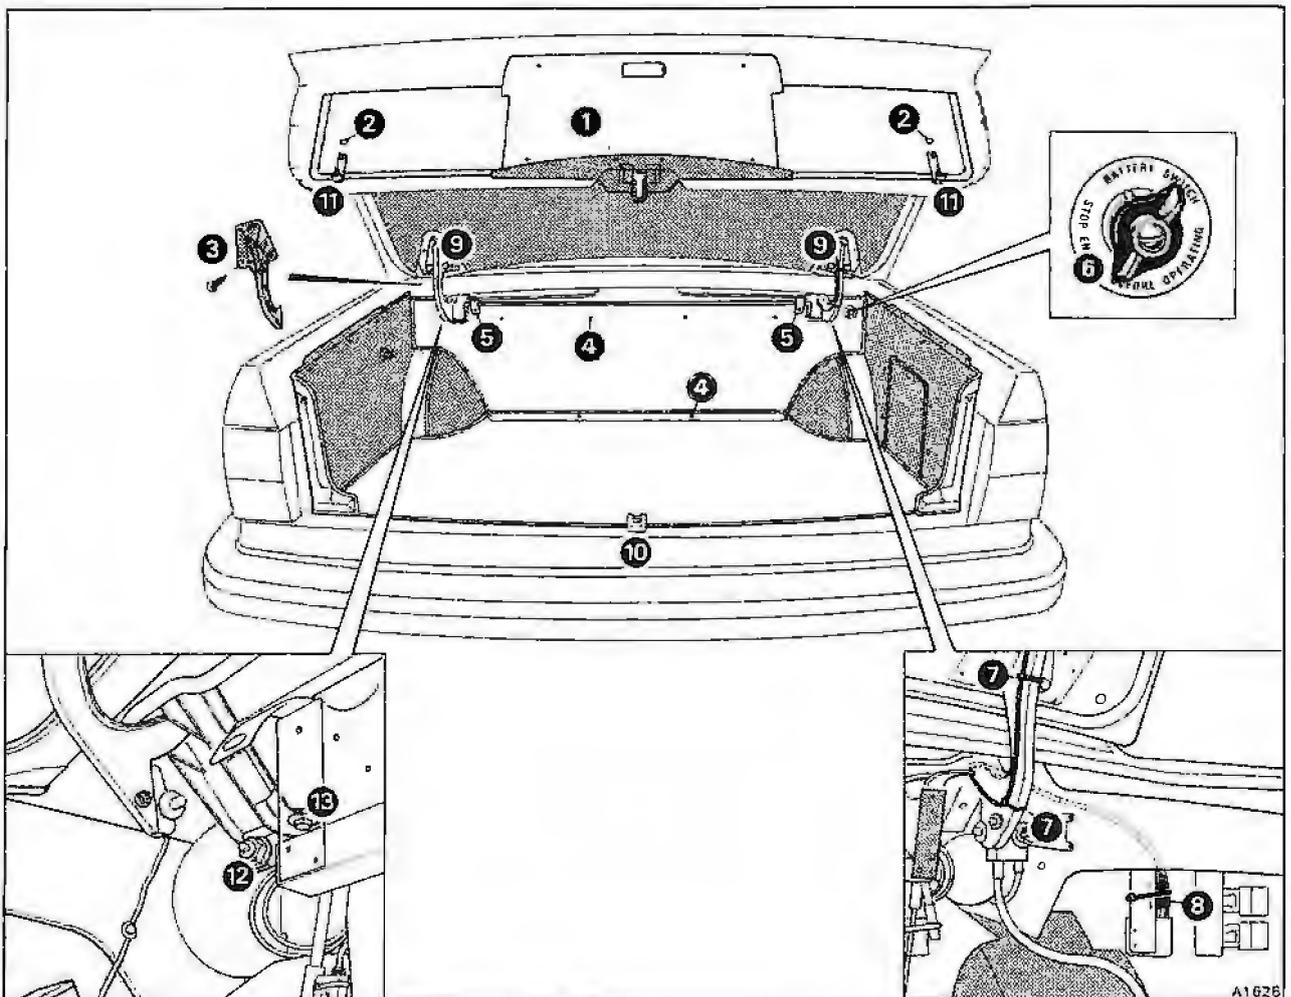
Luggage compartment lid trim and hinge mounting arrangement
